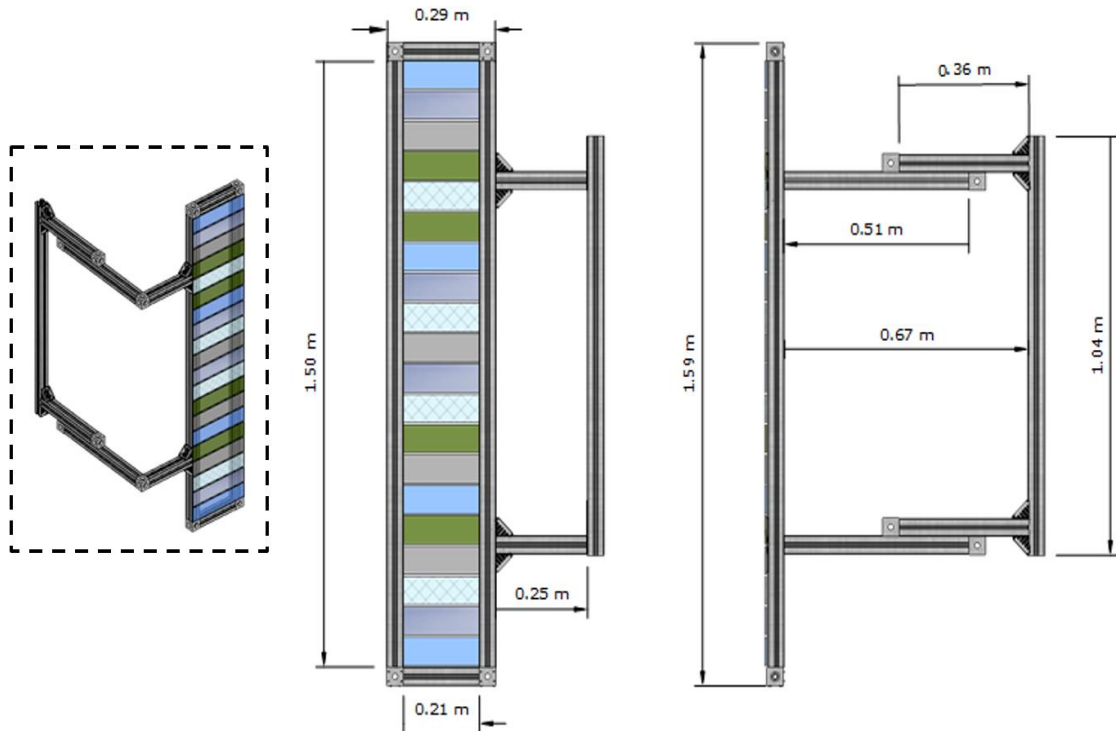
Details of the frame constructed to mount test panels onto the bus-wash structure.
